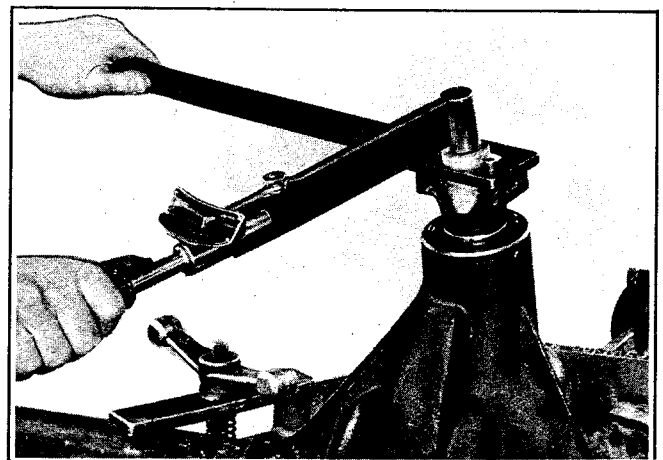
Tightening Nuts with Torque Wrench and Socket
